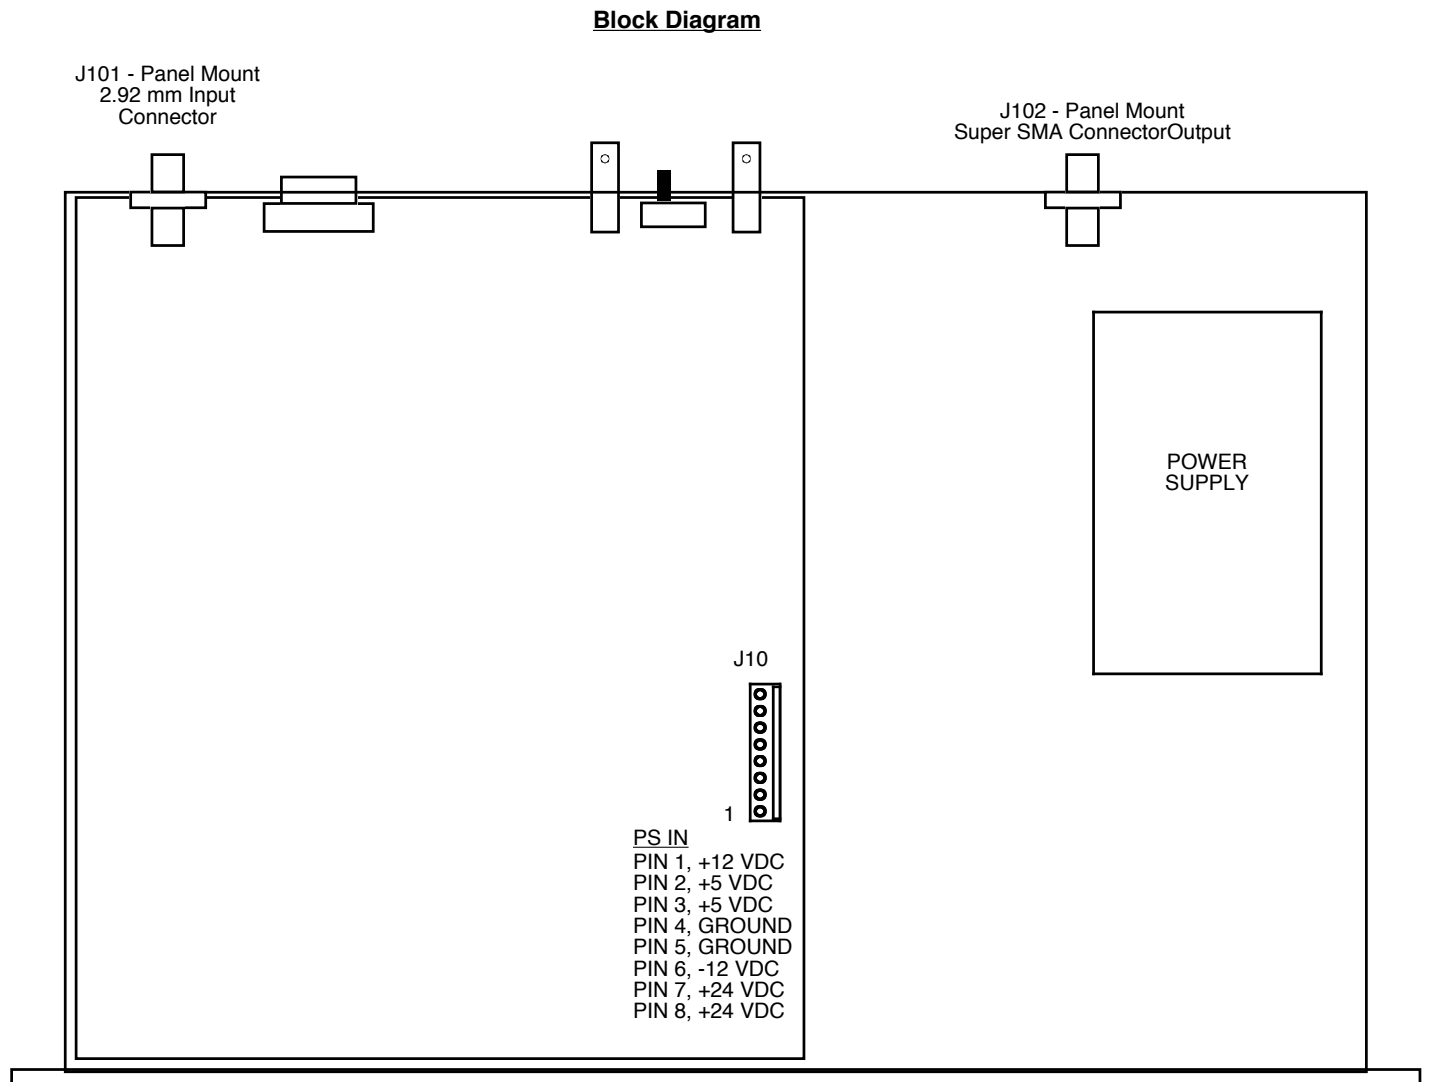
2116-31T21-15 Mechanical Assembly
